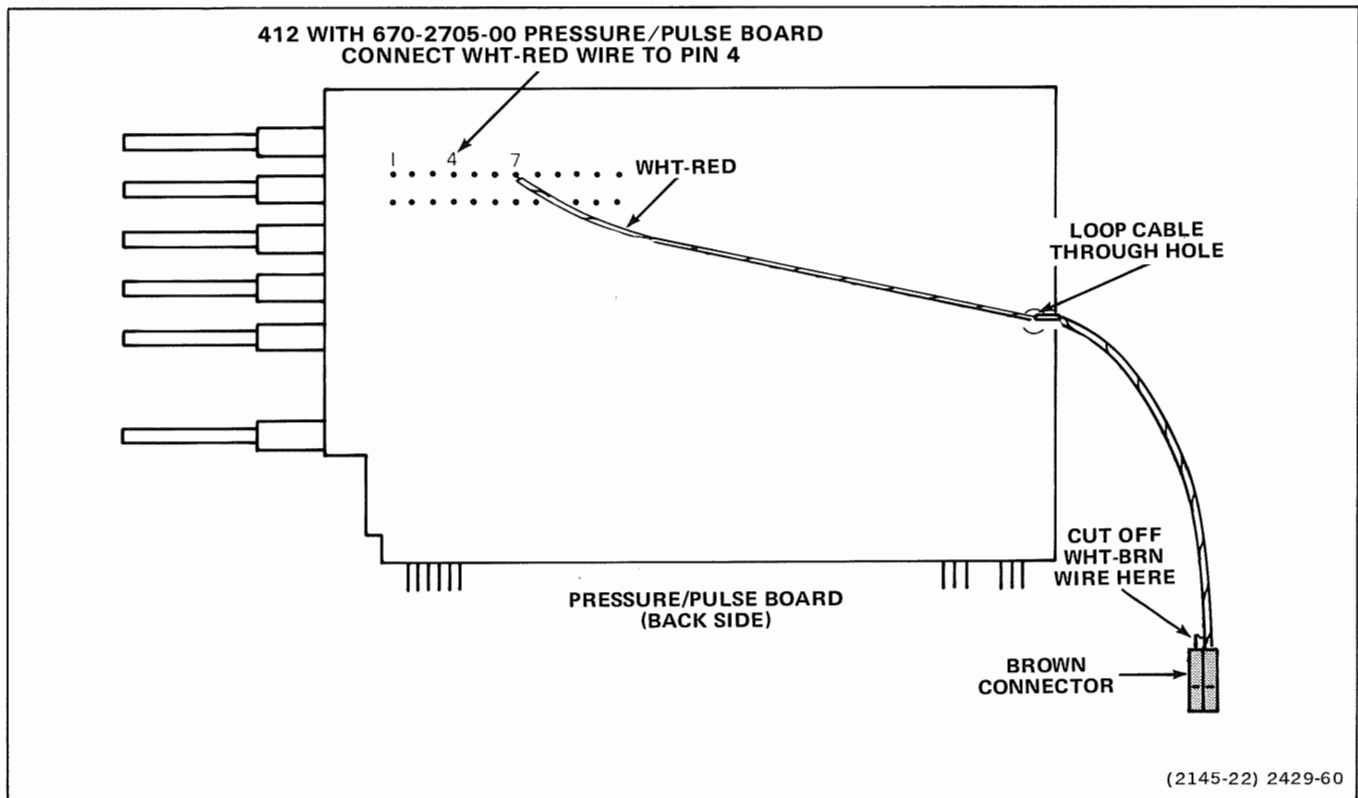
Installing 2-wire cable to 412 Pressure/Pulse Board.
